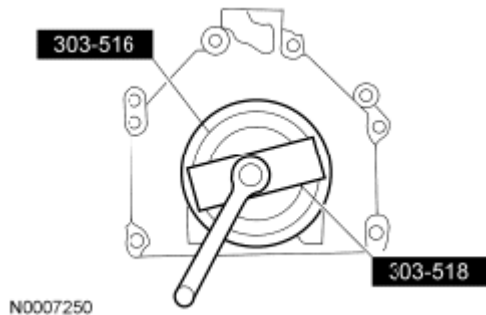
Installing Crankshaft Rear Oil Seal Using Special Tools
